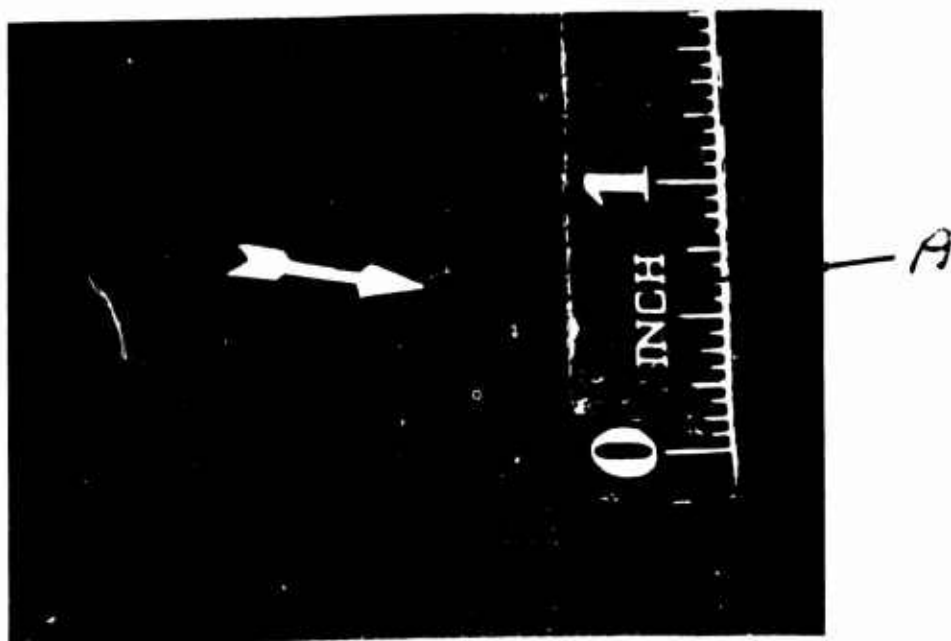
Multiple Cracks at Location A of APG Part No. 104 (Cocking-Lever Support) in Area of Connecting Pin Hole, Before Firing.
